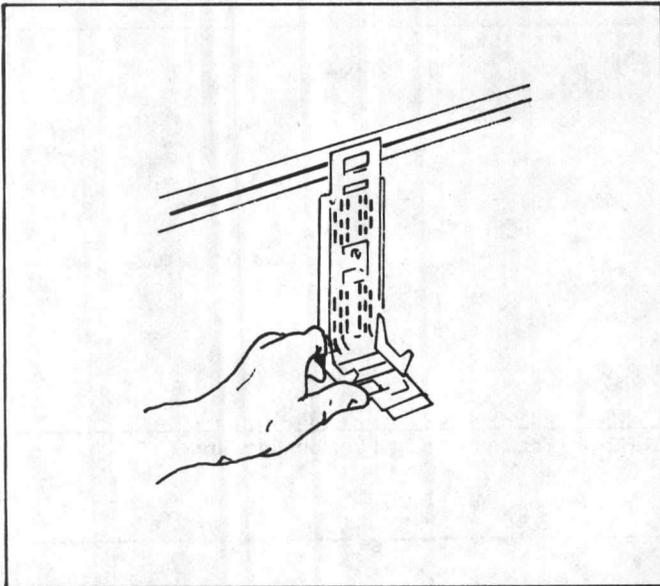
Installing the Element Cradle in Nylon Guides
